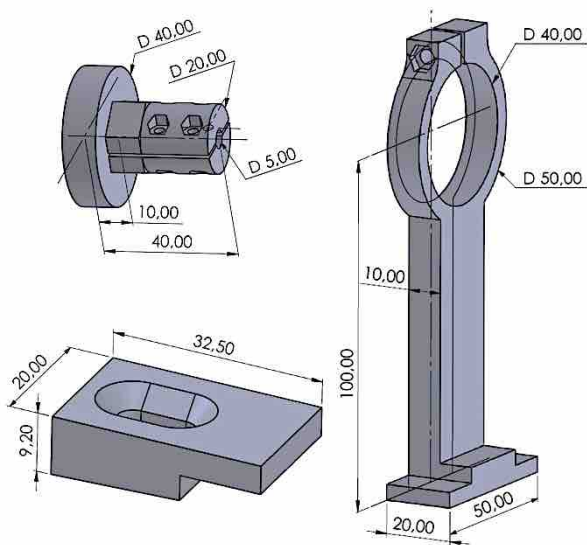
Technical drawing of the cap, clamp and the fixed support.
